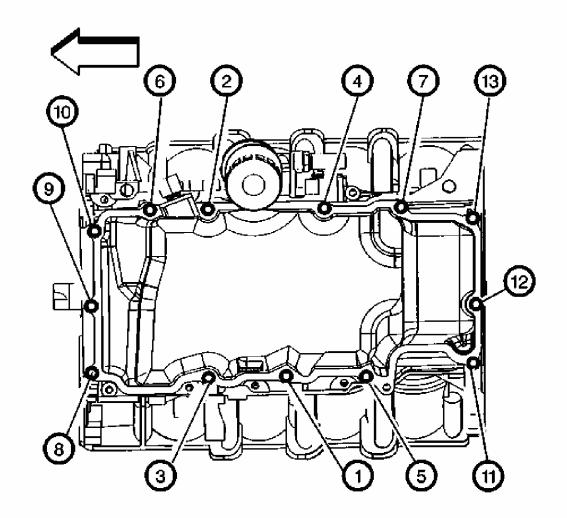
Identifying Oil Pan Bolts Tightening Sequence Courtesy of GENERAL MOTORS CORP.
